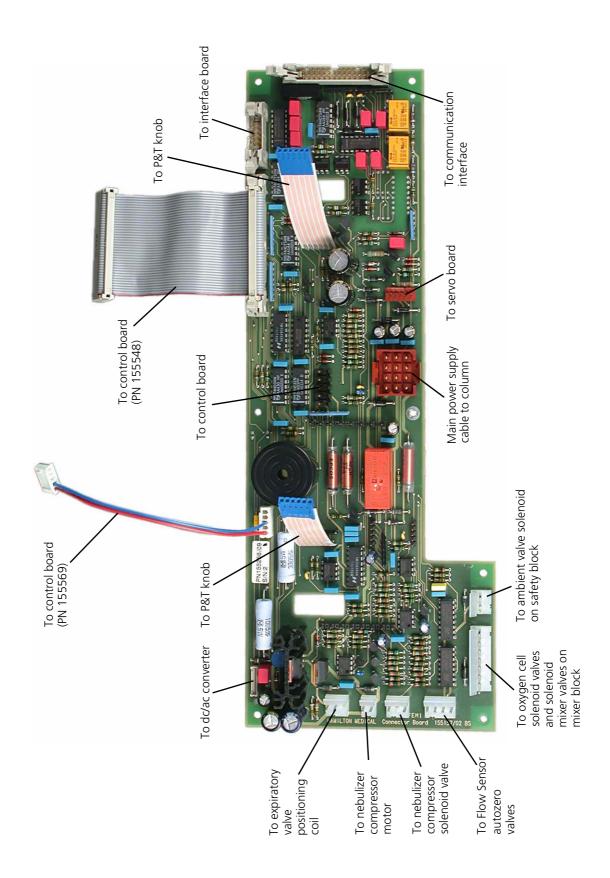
Cable connections to connector board PN 155256 Rev 9 and later
